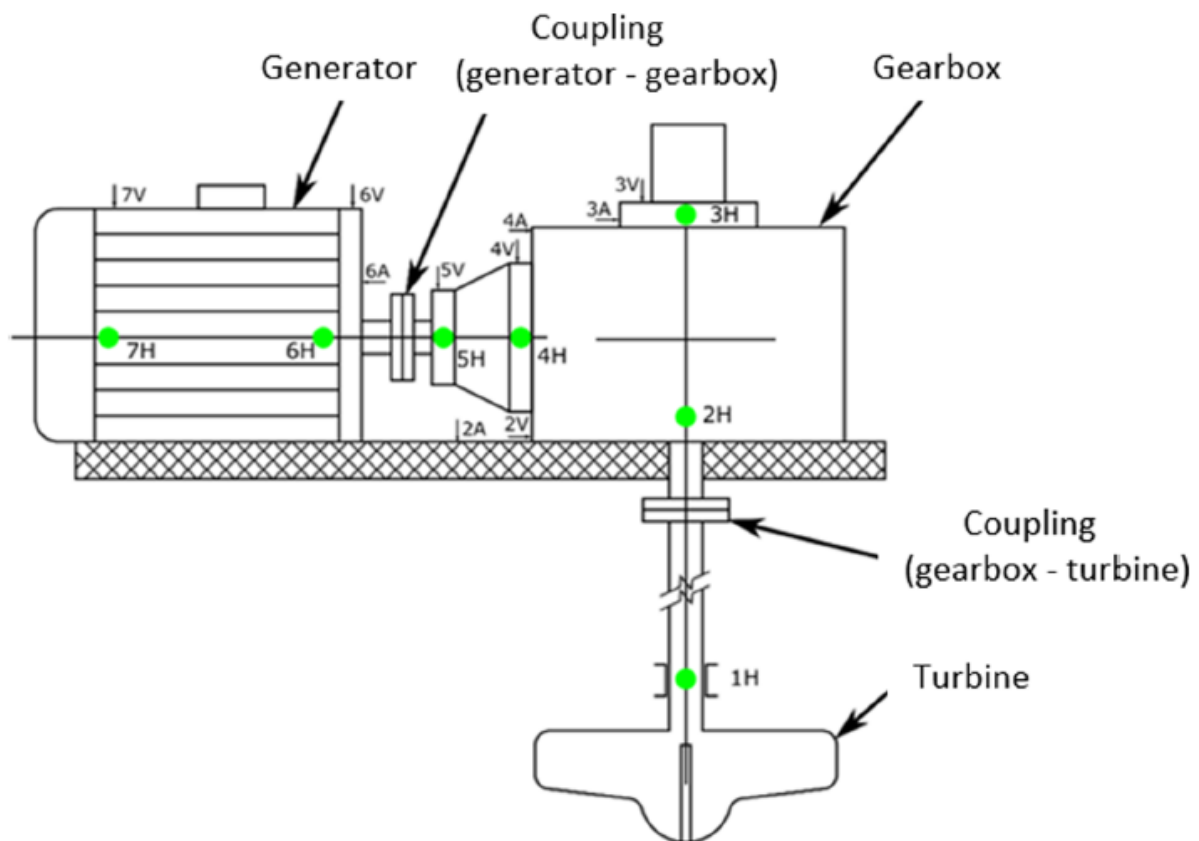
Measurement diagram with marking of the measurement points on the TG2 turbogenerator (1-plain bearing, 2 - bearing of the vertical transmission shaft at the output, 3 - bearing of the vertical transmission shaft, 4 - bearing of horizontal transmission shaft near to the bevel pinion, 5 - bearing of the horizontal transmission shaft near to the coupling, 6 - the place on the generator closer to the coupling, 7 - the place on the left on the generator, measured directions: *H* - horizontal, *V* - vertical, *A* - axial).
